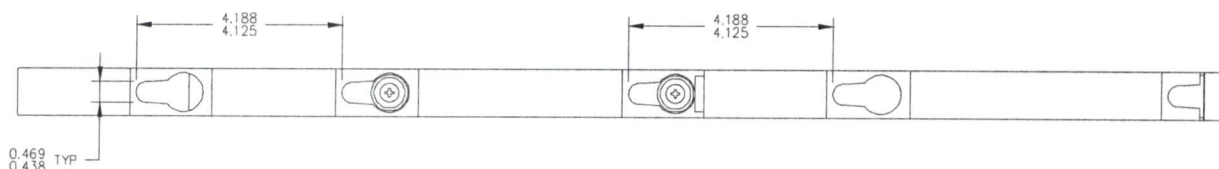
Critical Keyway Dimensions (Forward Beam)
